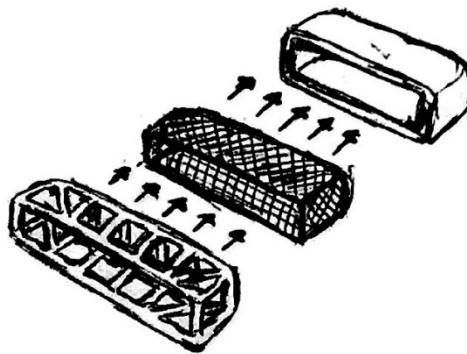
Exploded view of the cover-mesh-frame cover design concept
